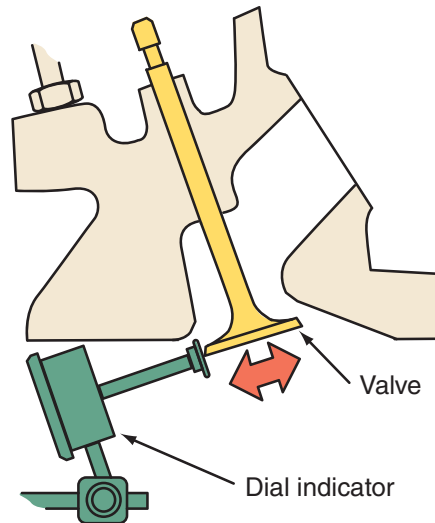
Checking for valve guide wear with a dial indicator.
